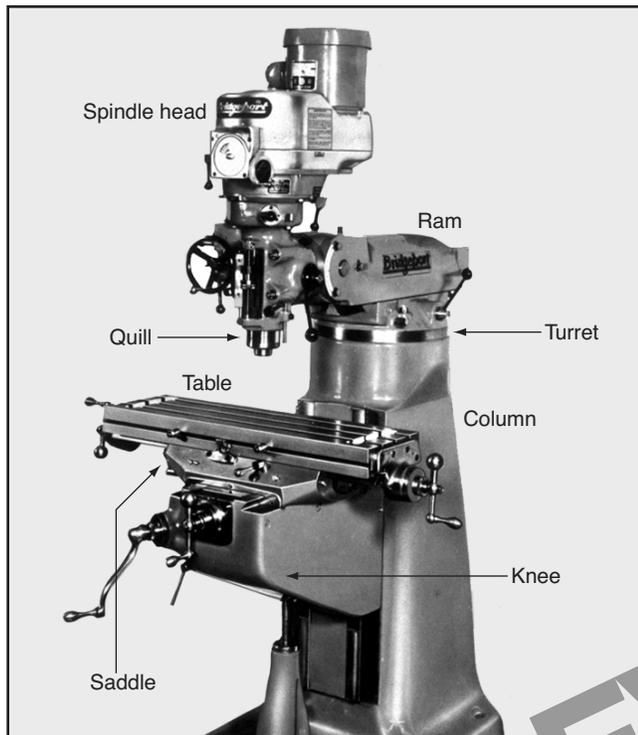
Ram-and-turret type knee-and-column milling machine
